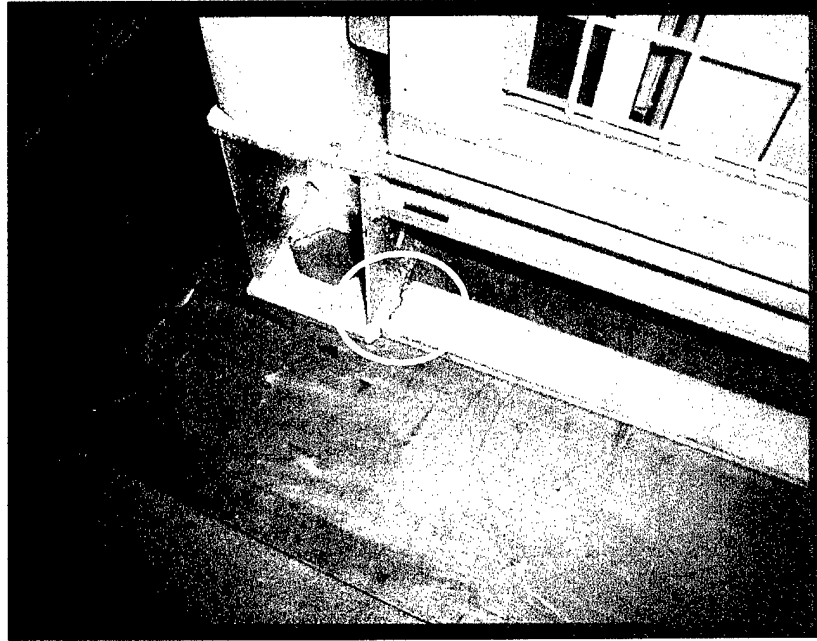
ISTF Unit #1 Cracked Weld on the Base Structure.
